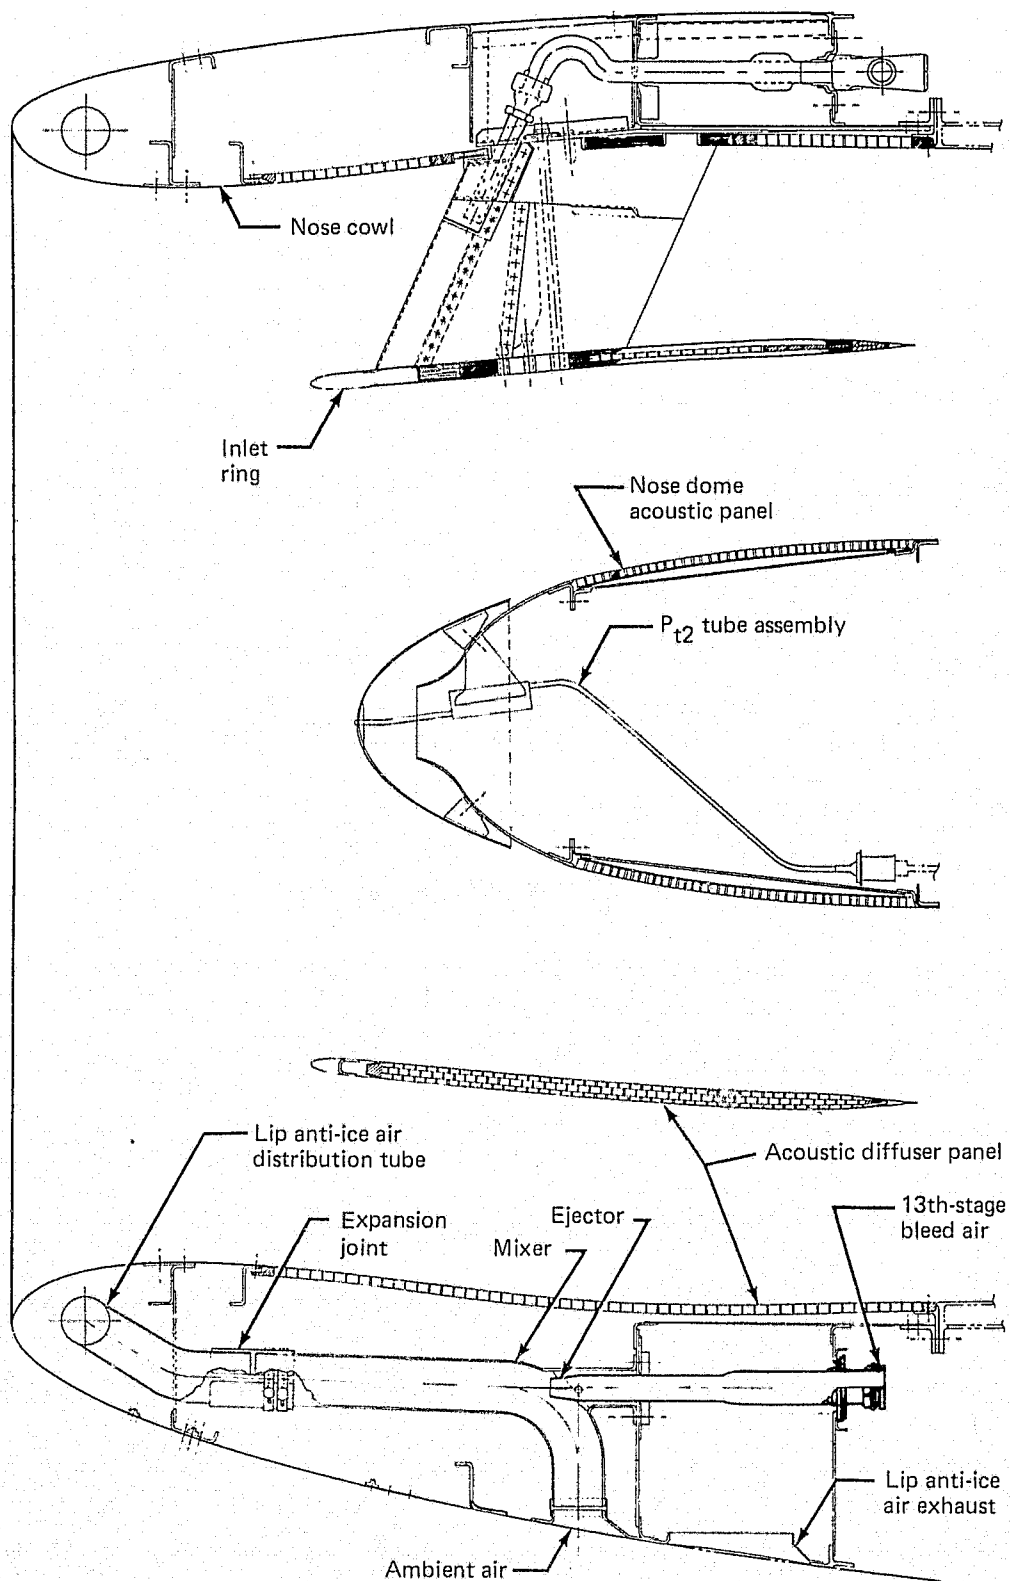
JT8D Refan Side-Engine Inlet Construction
